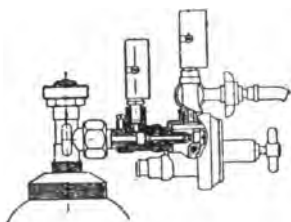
Cross section of pressure-reducing valve for oxygen bottle.
